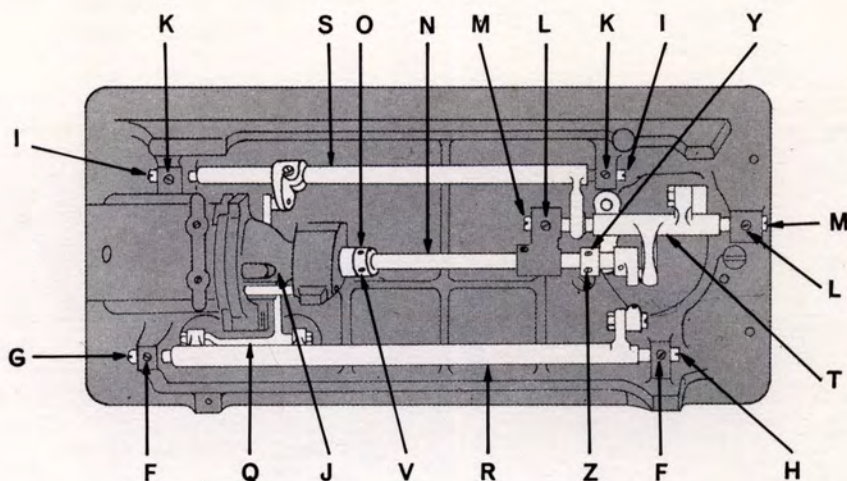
Setting Feed Dog Sidewise and Adjusting for End Play or Binding.
